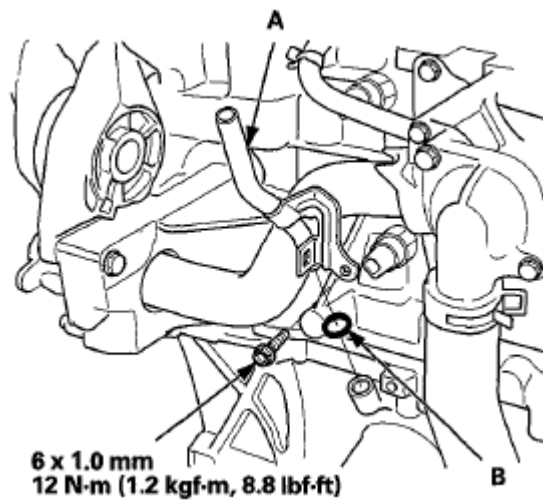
Identifying Transmission Mounting Bolts With Torque Specifications
